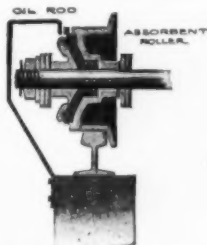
METHOD OF SUPPLYING OIL ON HORIZONTAL RUNS OF CONVEYOR.
